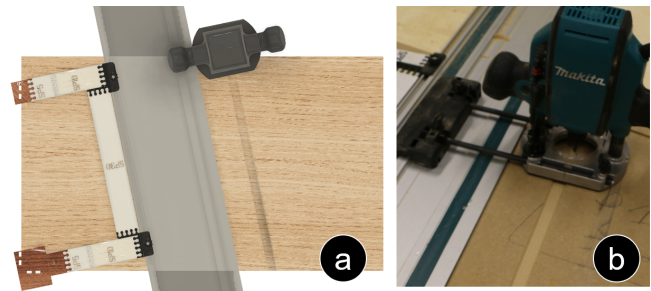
Fabricating a groove using the ruler guide (b) according to the instructions (a).
